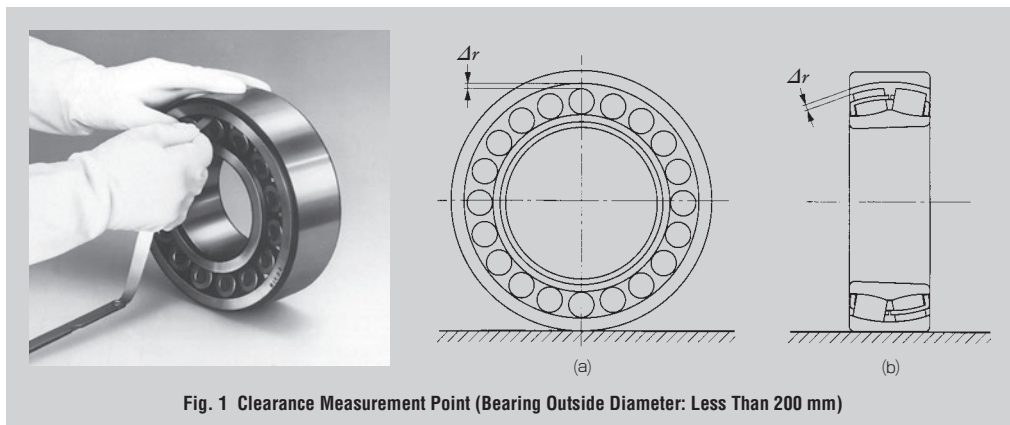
Clearance Measurement Point (Bearing Outside Diameter: Less Than 200 mm)
